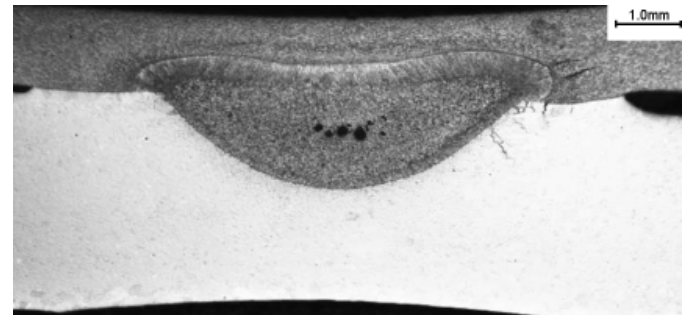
General view of the weld joint with visible cracks and porosity in the welding nugget, etched with Ma1Al
